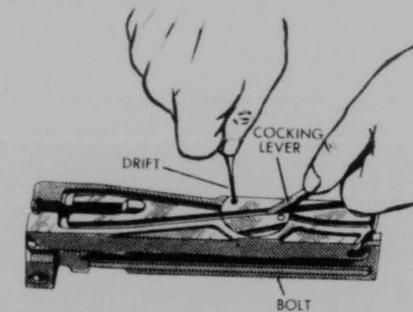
Repositioning Bolt Switch, Using Cocking Lever as Tool.
